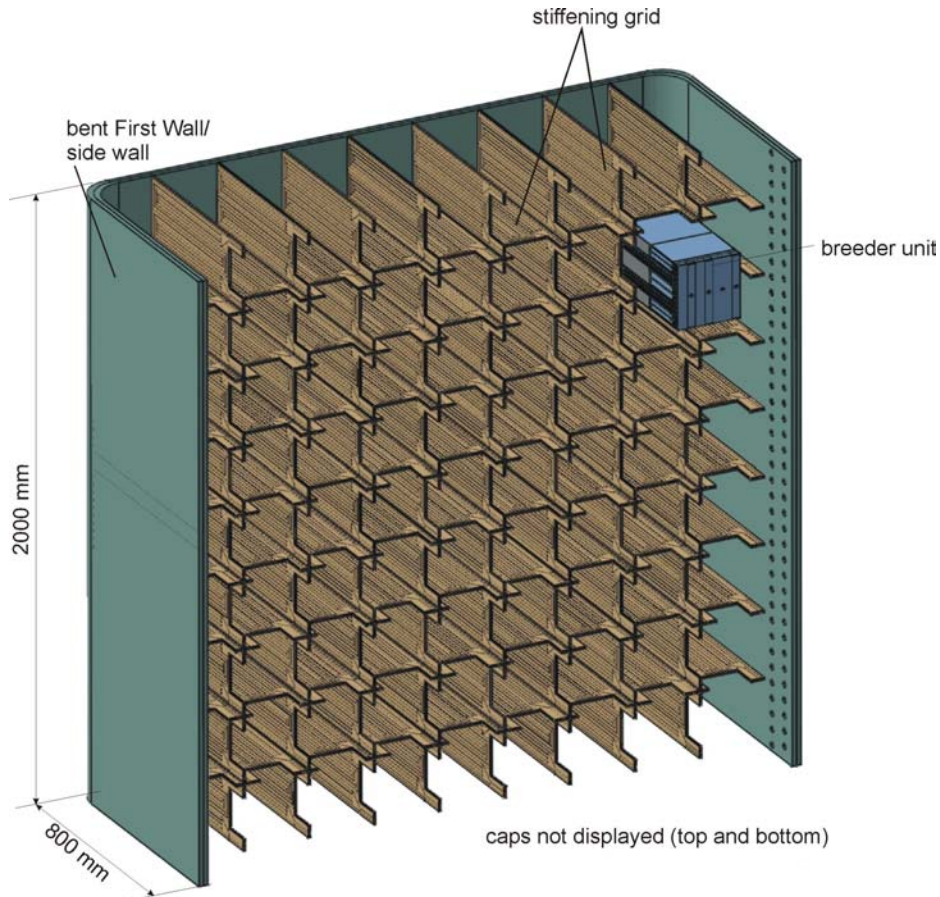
Open blanket box seen from radial back (caps not shown). Caps and stiffening grid are welded into the box, breeder units are inserted at this stage.
